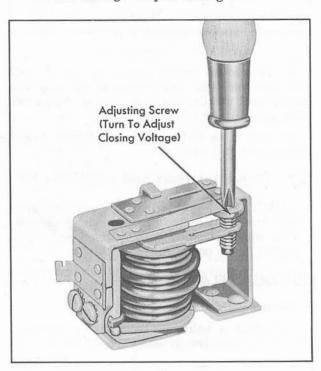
Adjusting Cut-Out Relay Closing Voltage
